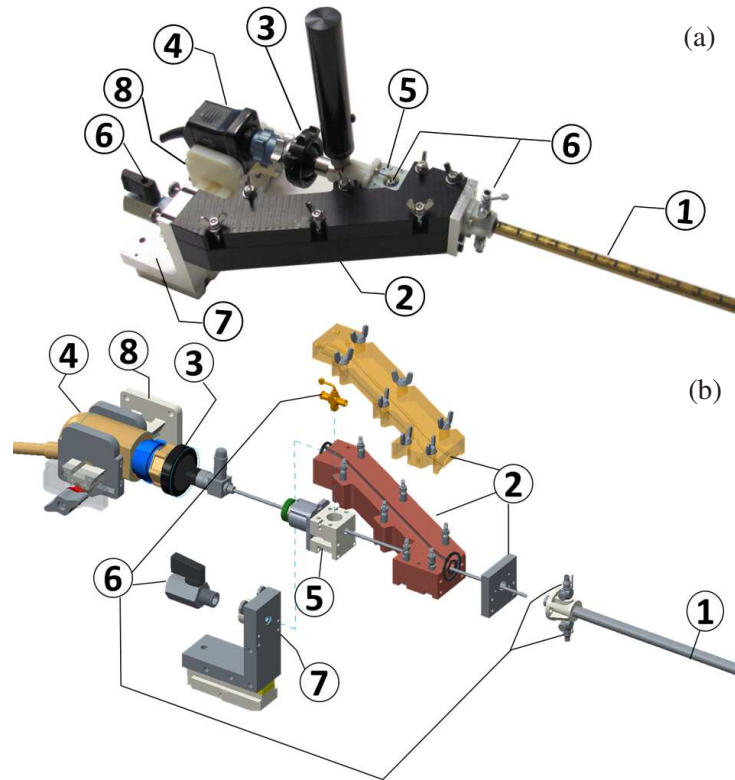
Exploded CAD view of (a) Robot-integrable resectoscope, (b) Assembled prototype. Number designation:(1) stem including a custom central stem housed and sealed within an external sheath, (2) sealed adaptor which enables insertion of a visualization module and MBCR, (3) 26Fr endoscope and portable light source, (4) CCD camera, (5) fully-rotatable endoscope guidance unit, (6) an array of valves (6) for enabling controlled irrigation and selective sealing of the visualization and the robot access ports, (7) quick-release L-shaped bracket, (8) a camera fixture.
